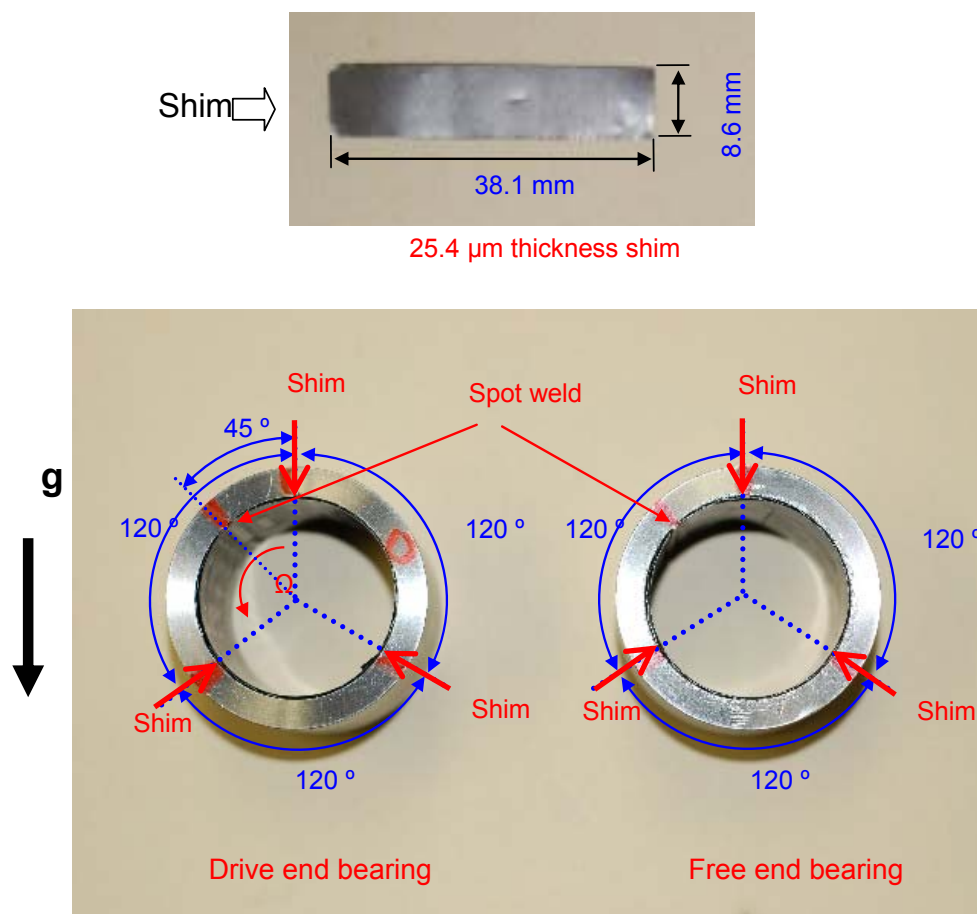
Locations of three shims relative to top foil spot-weld in test bearings.
